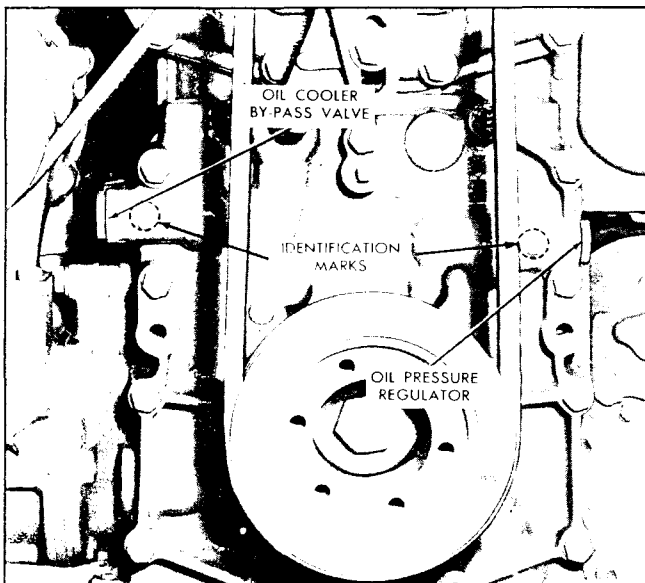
Location of Current Oil Pressure Regulator Valve -- In-line Engine Shown
